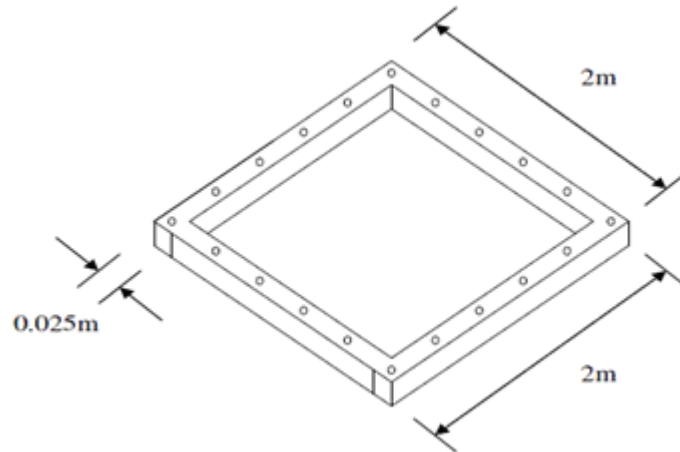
Configuration and dimensions of the four hollow square steel tubes connected together by means of plastic inserts and specially fabricated two-way joints to form a spacer ring.
